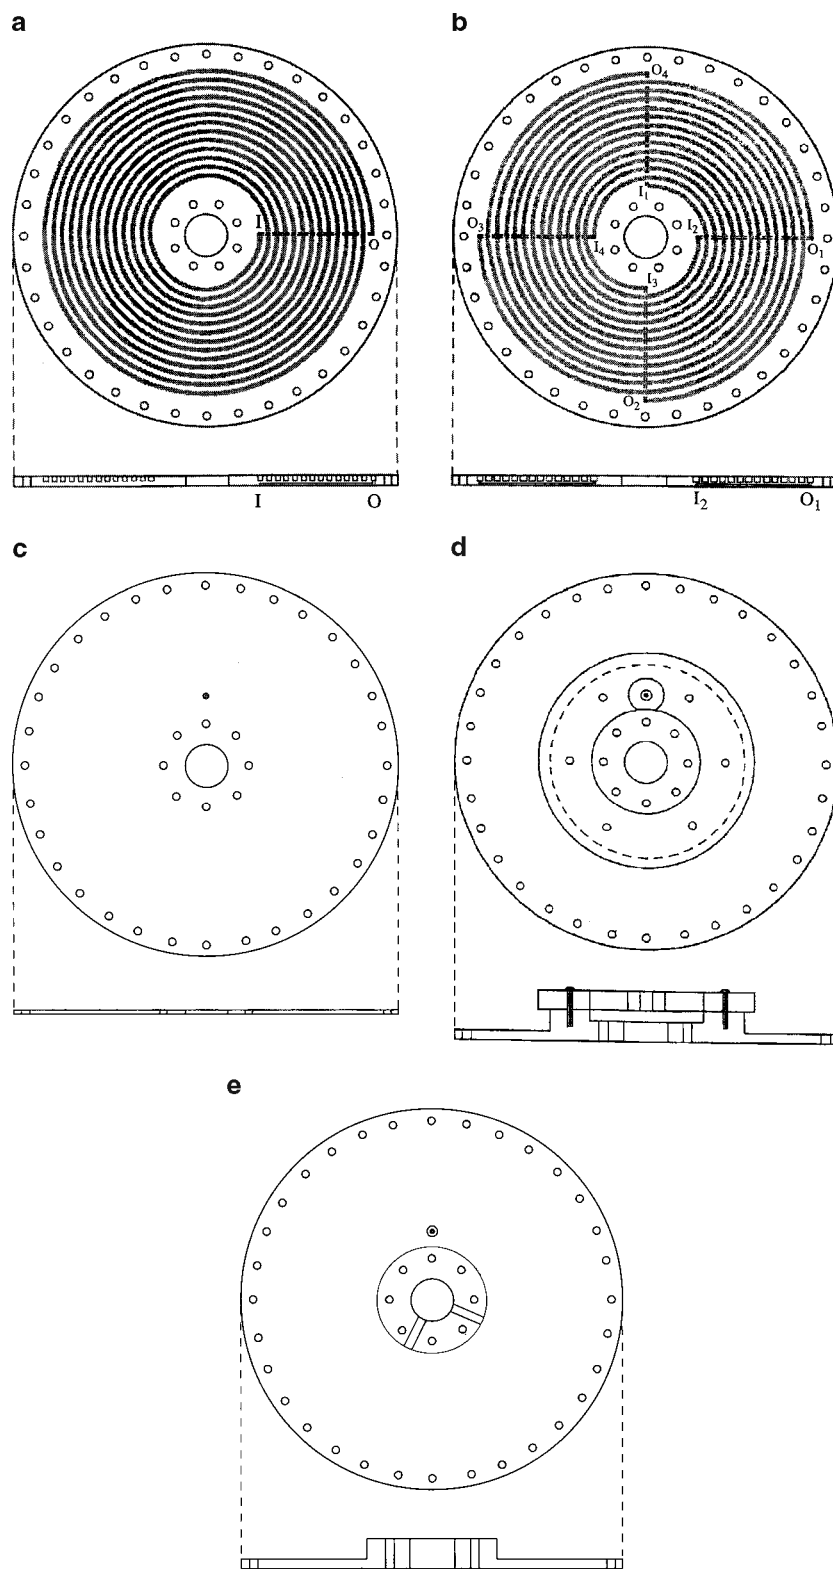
Drawing of each component of the spiral disk assembly. a, Disk with a single spiral; b, Disk with four spirals; c, Teflon sheet septum; d, Upper flange equipped with a plastic gear; e, Lower flange.
